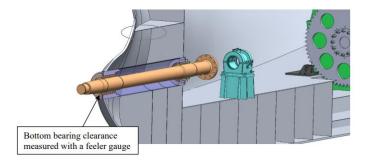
Clearance measurements in installations with both stern tube bearings, ABS [12]
